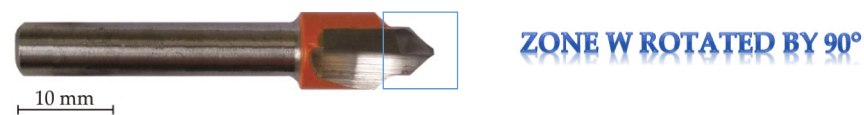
Zone W rotated by 90° for the investigation of the wear of the tool cutting edge.
